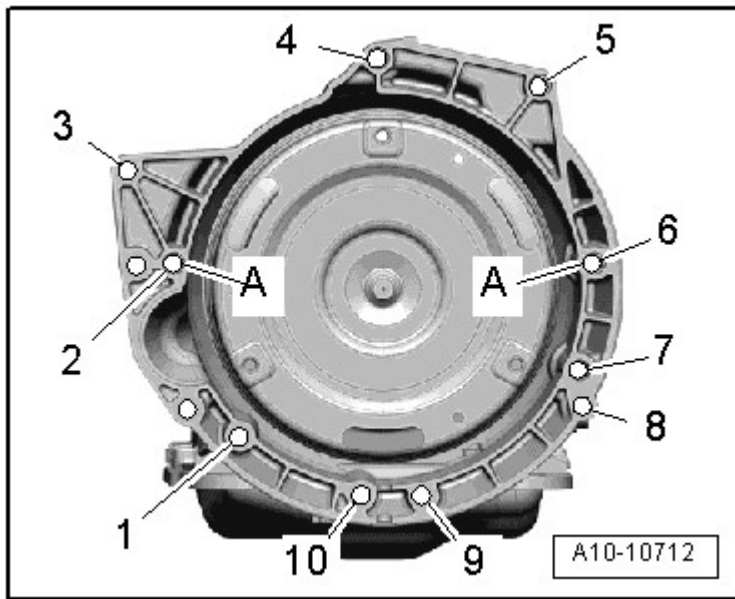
Identifying Transmission To Engine Mounting Bolts
